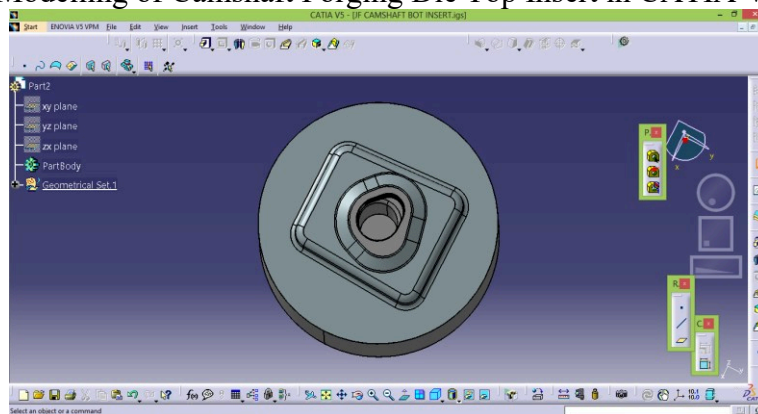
Modelling of Camshaft Forging Die Bottom Insert in CATIA V5 Software.
